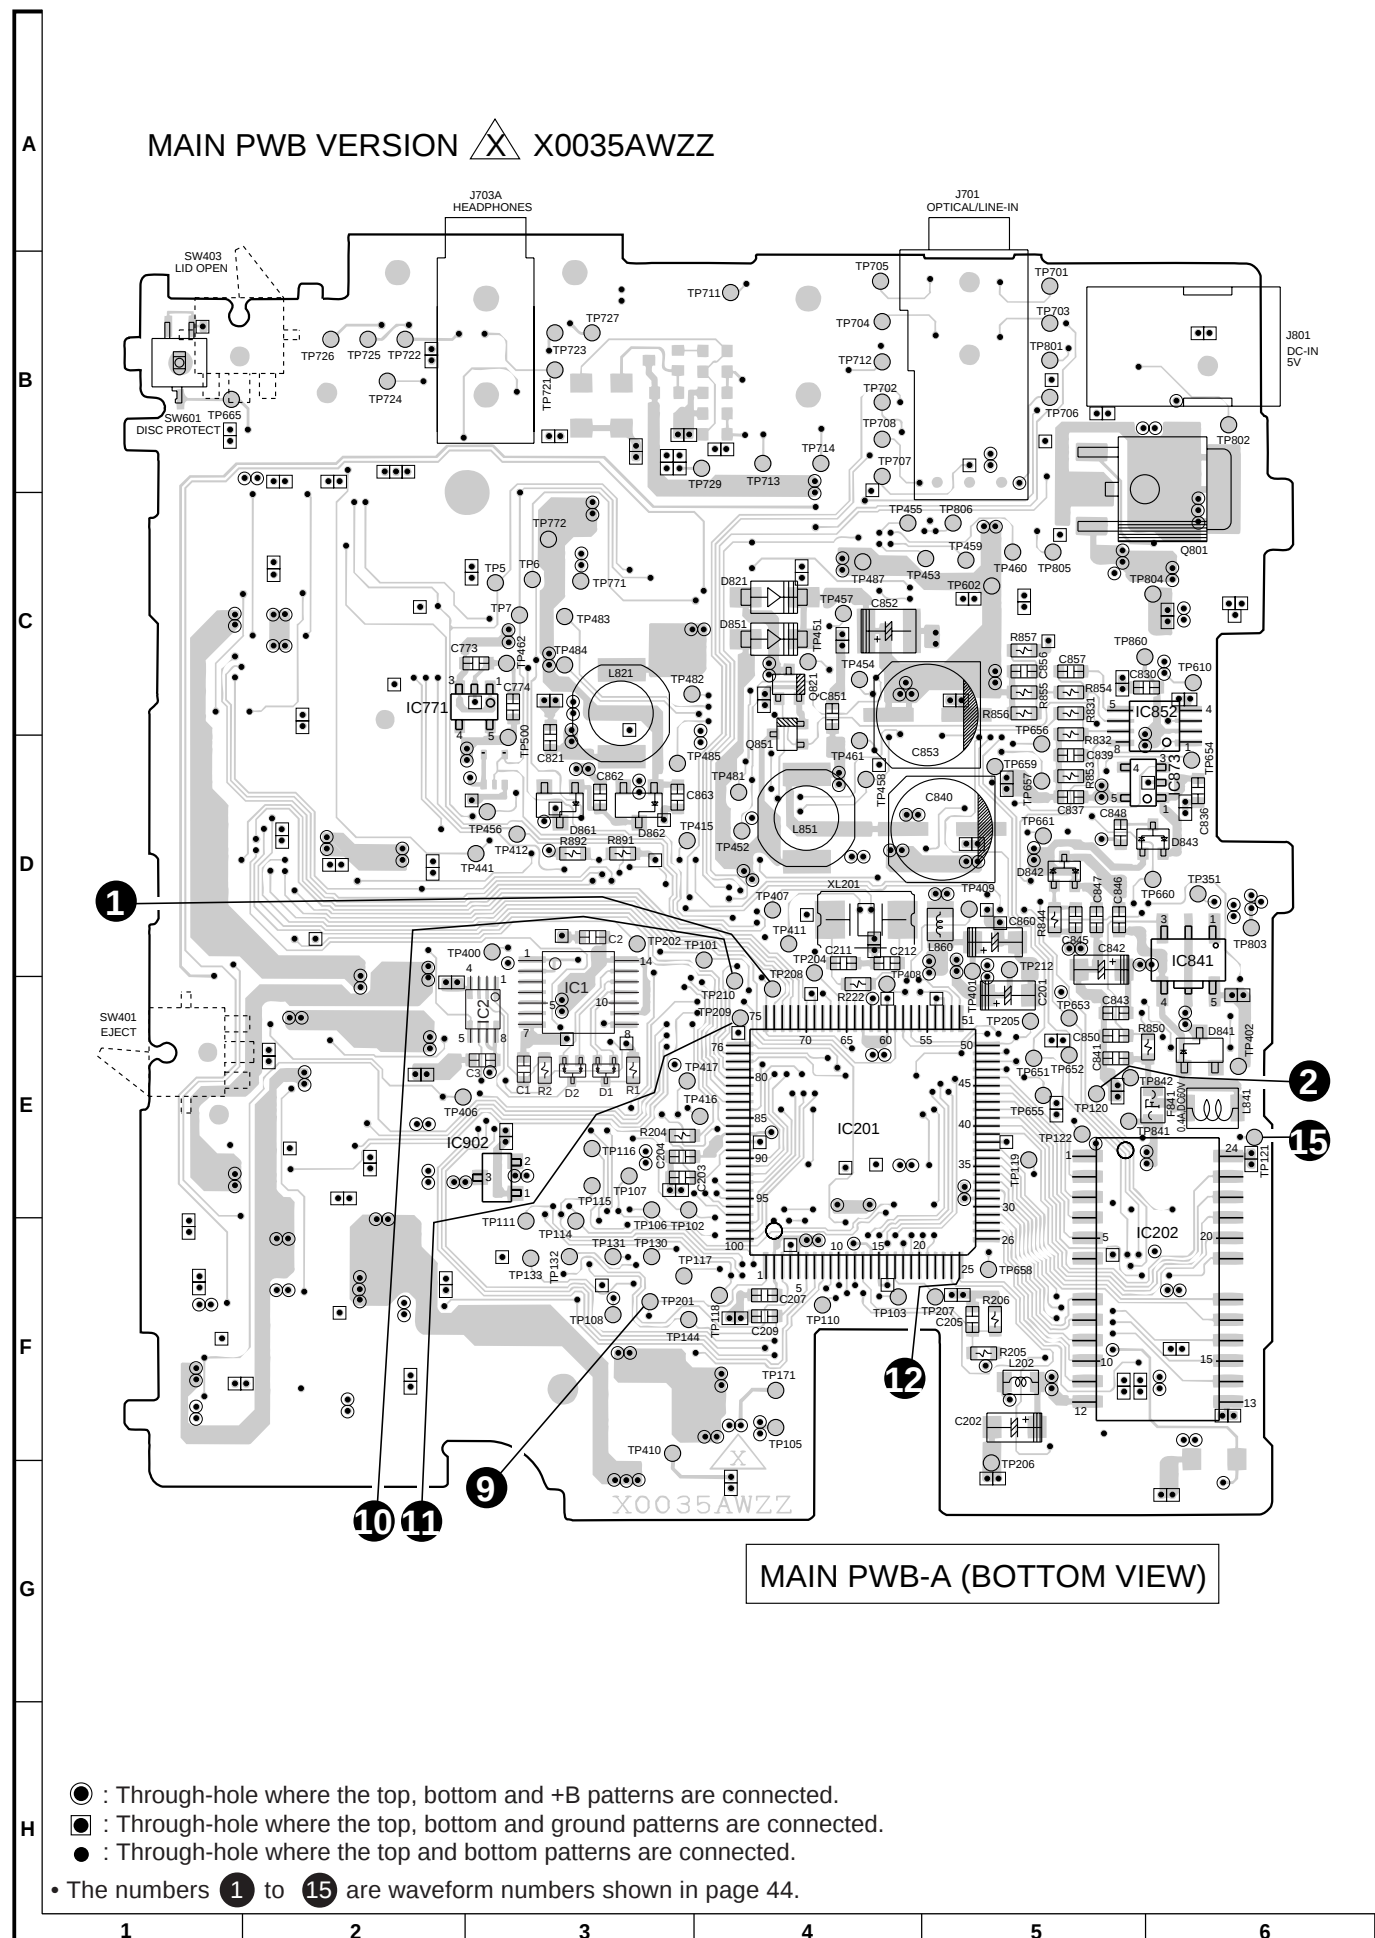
WIRING SIDE OF P.W.BOARD (7/11)
